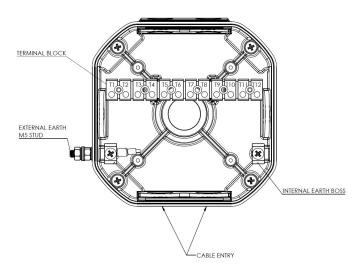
Entry Unit (Beacon 1) Internal Detail & Terminal Block
